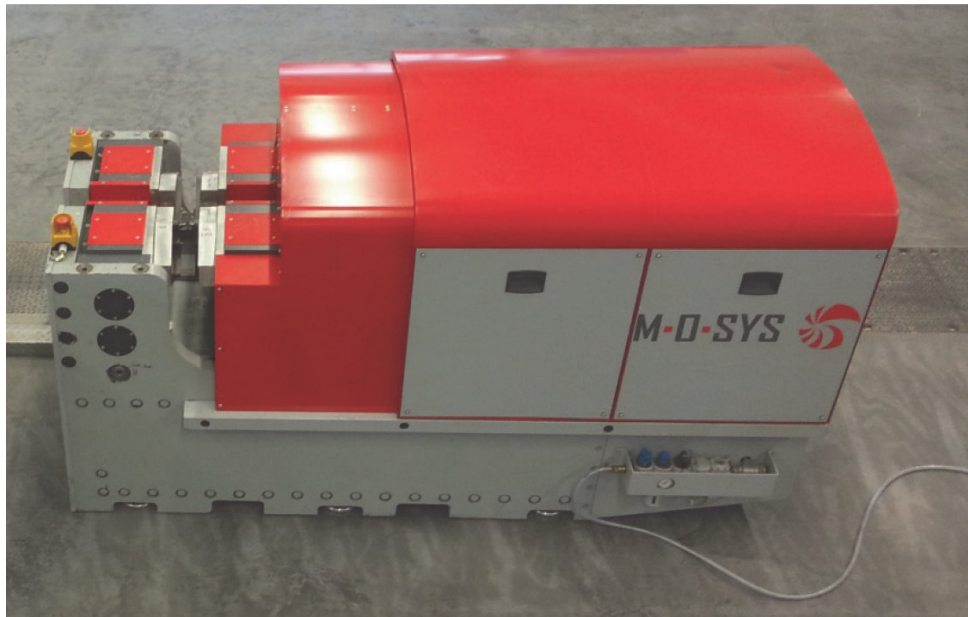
Multi-orbital-friction welding machine dyconn-100.
